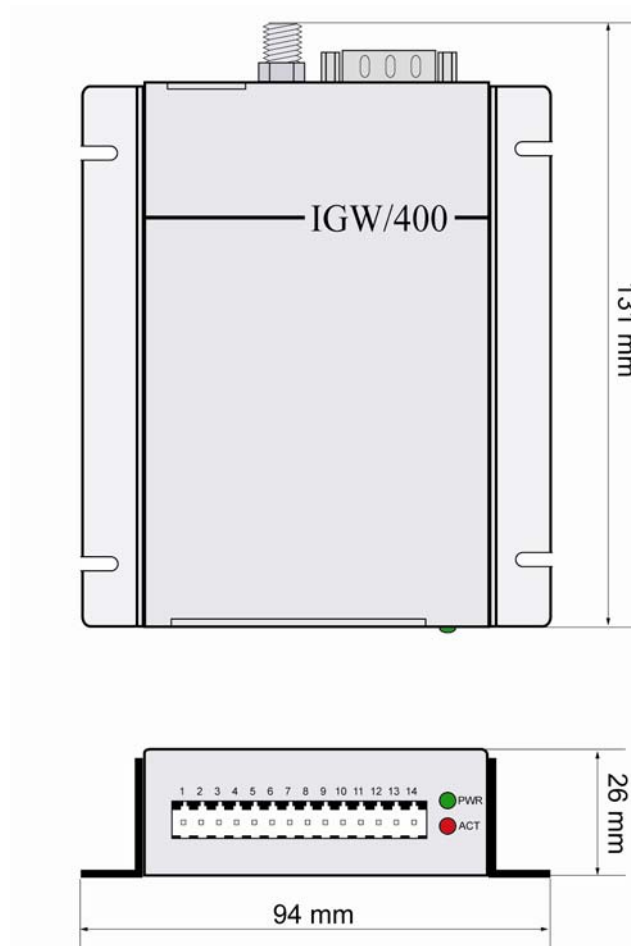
Mechanical dimensions of IGW/400-CAN with wall mounting set
